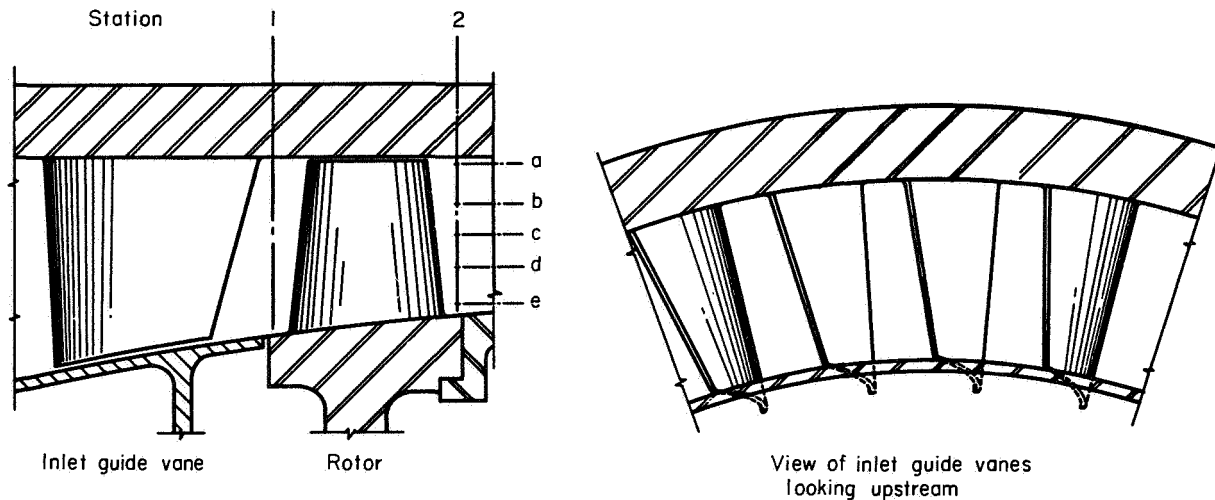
Schematic layout for tests of inlet guide vanes and rotor (ref. 44).
